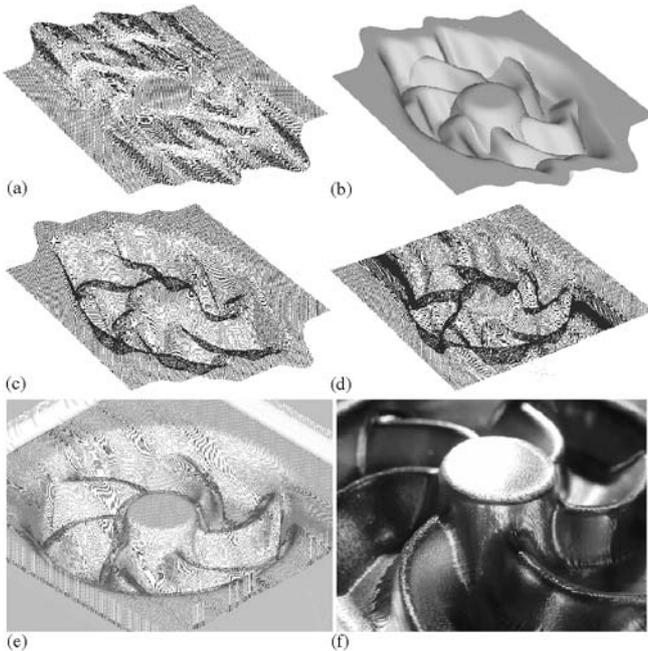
f. Example of CL surface deformation for a constant scallop height tool path a Deformation vectors b Deformed CL surface c Iso-plane tool path d Constant scallop height tool path e Machining simulation f Machined part (0.006 mm scallop height)
